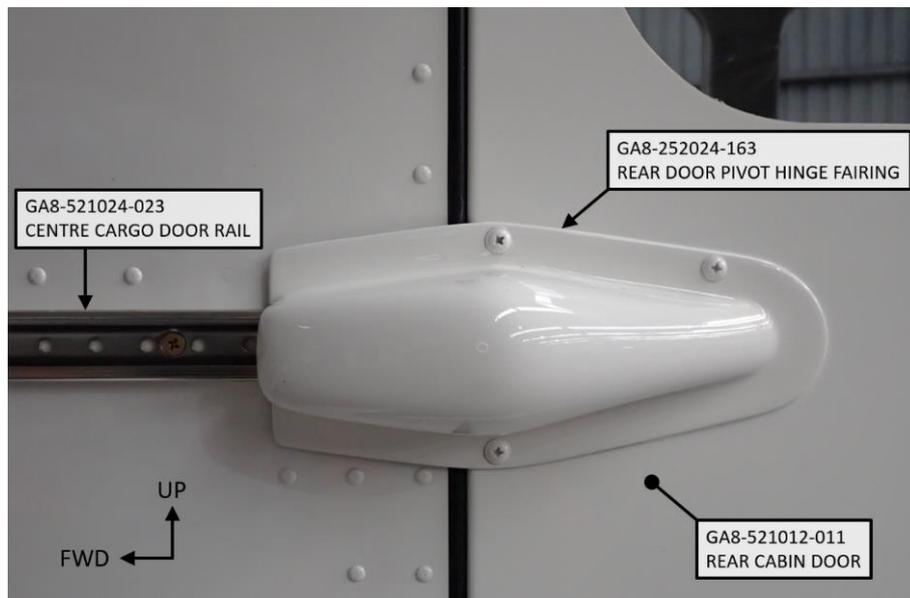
Removal of the Rear Door Pivot Hinge Fairing. View looking at the exterior surface of the aircraft's port side fuselage wall.
